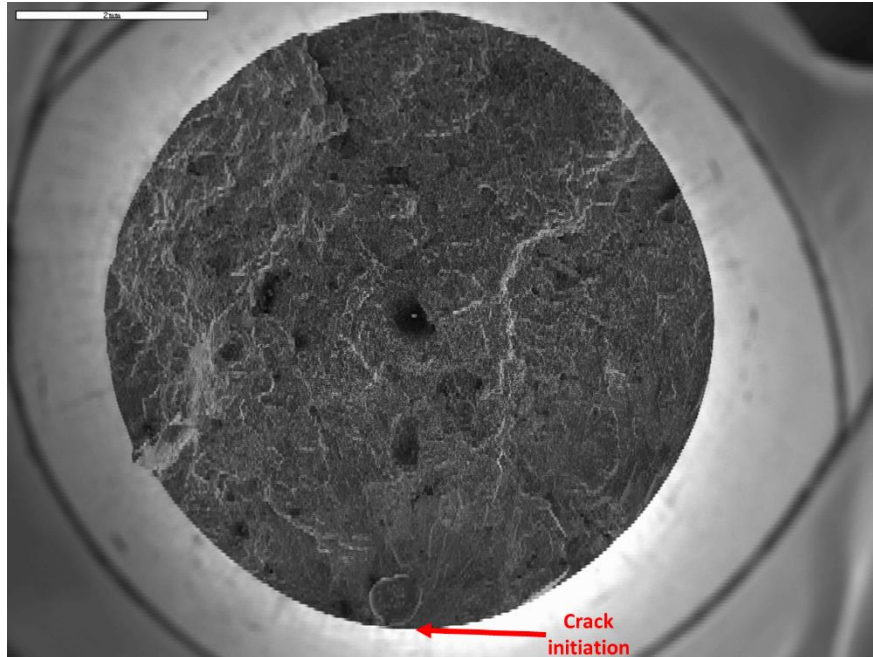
Overall view of the fracture surface of A356 alloy uniaxial specimen.
